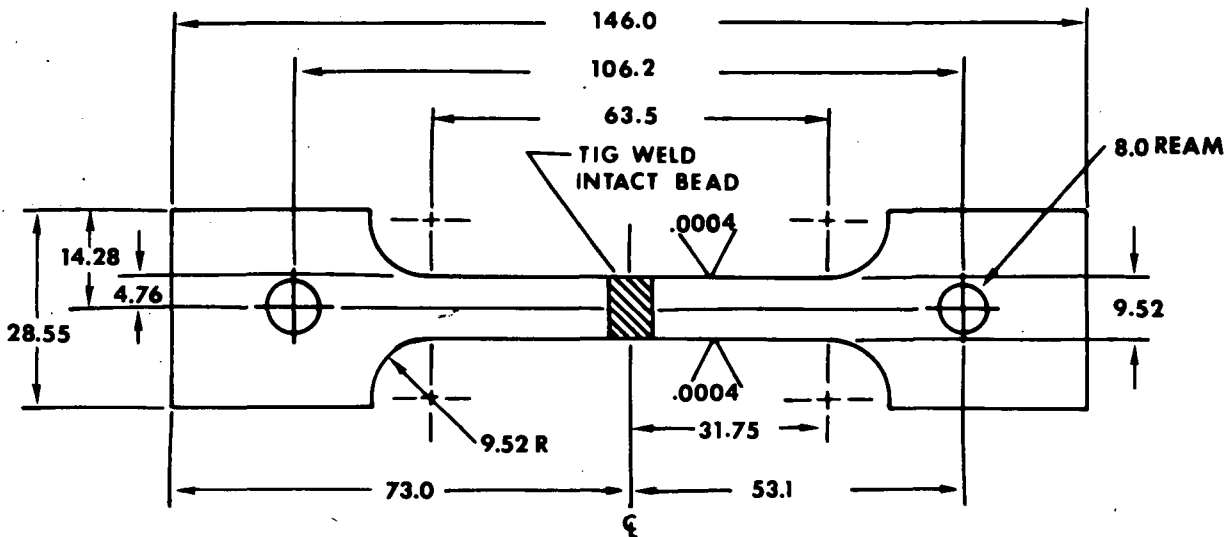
TRANSVERSE WELD TENSILE SPECIMEN FOR CRYOGENIC TEMPERATURES
